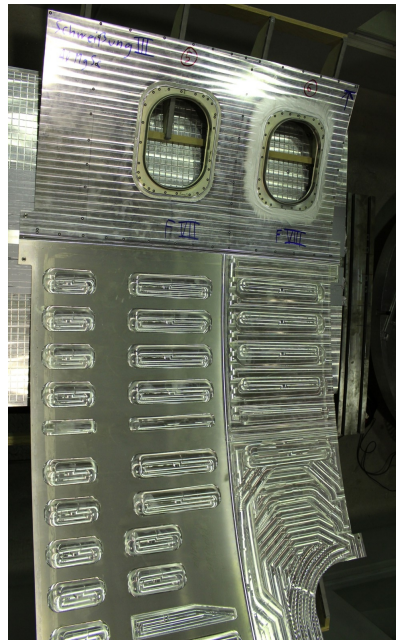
Section 15 FSW-Demonstrator: window frames and panel-to-panel friction stir welded joints. Weight reduction pockets are present. Scale 1:1
